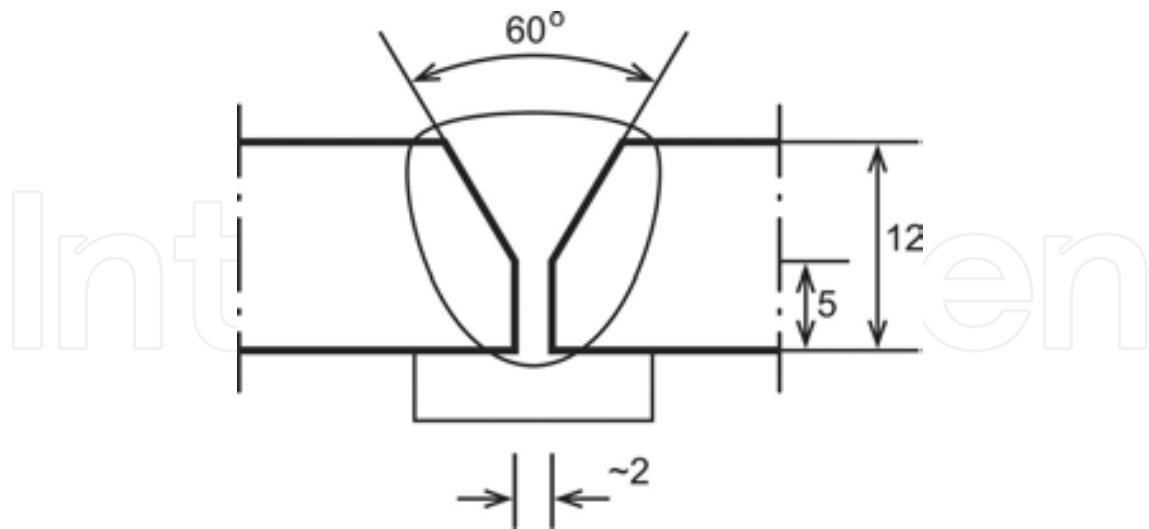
Scheme of the welded joint with technology chamfering.
